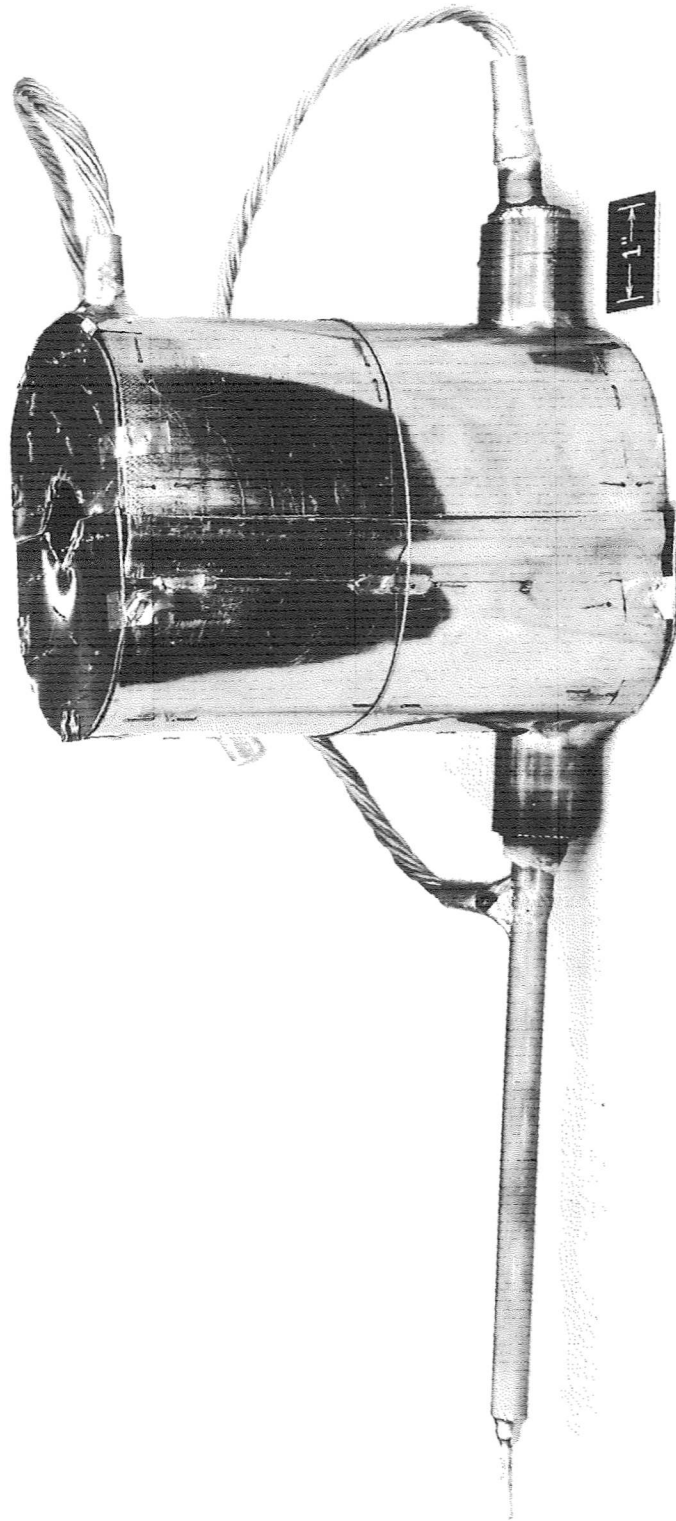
Refractory Metal Furnace for Annealing of Corrosion Loop Weldments. (C65032922)
